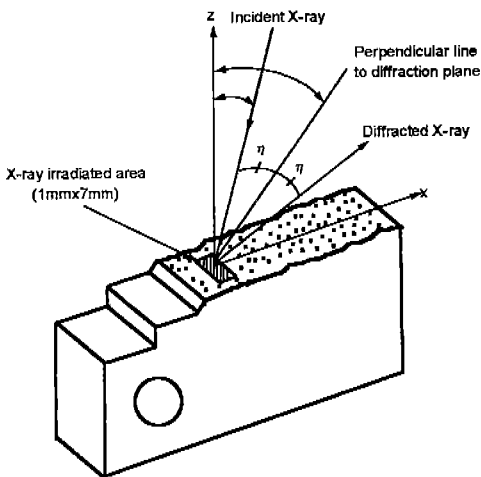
Schematic illustration of X-ray irradiated area on fatigue fracture surface
